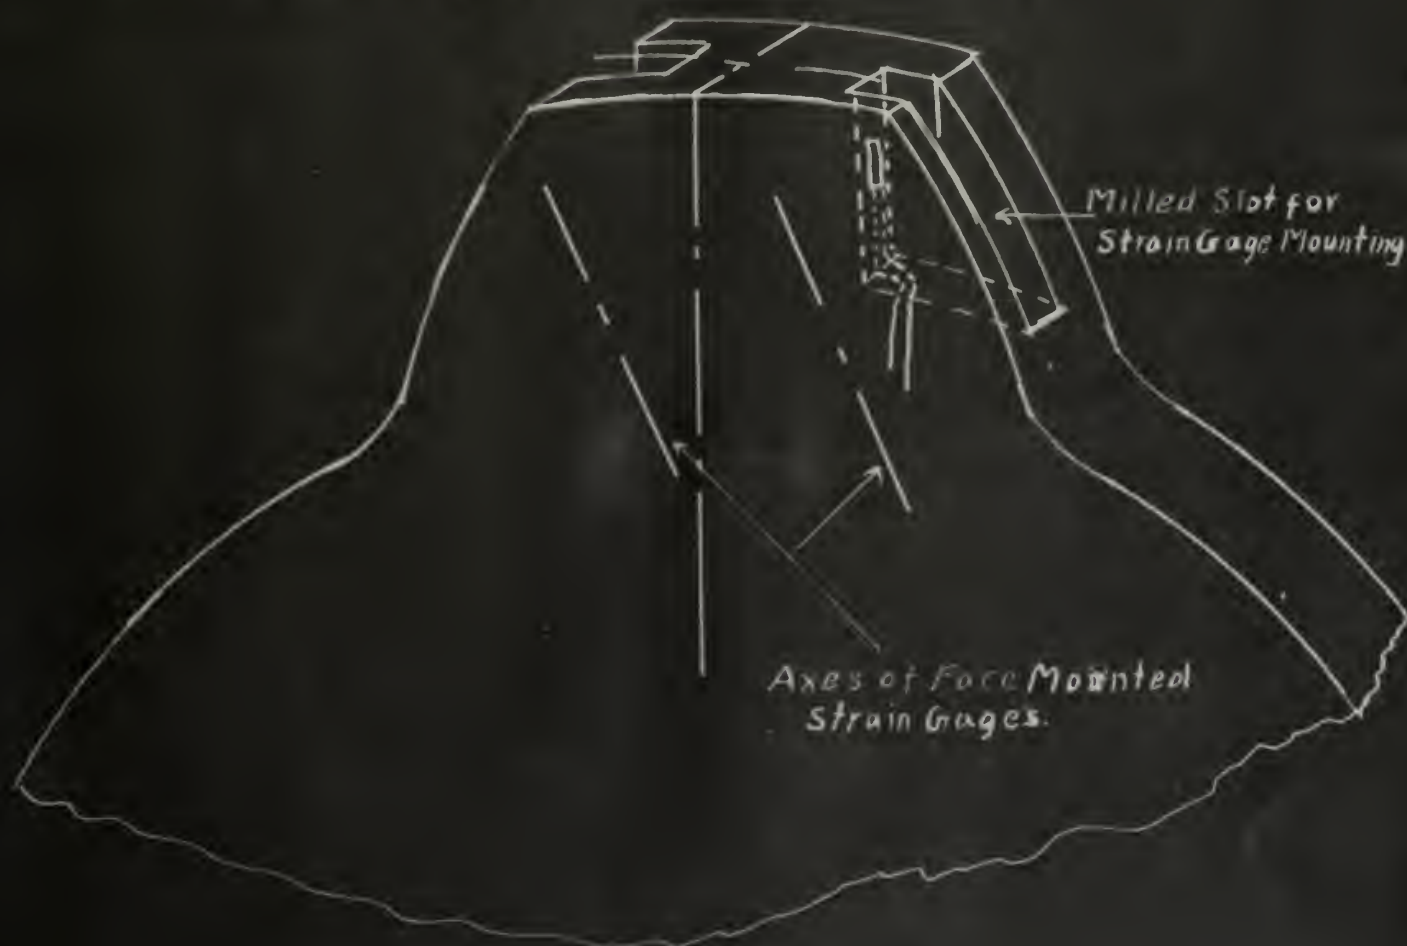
(b) Methods of Mounting Strain Gages on Test Gear.
